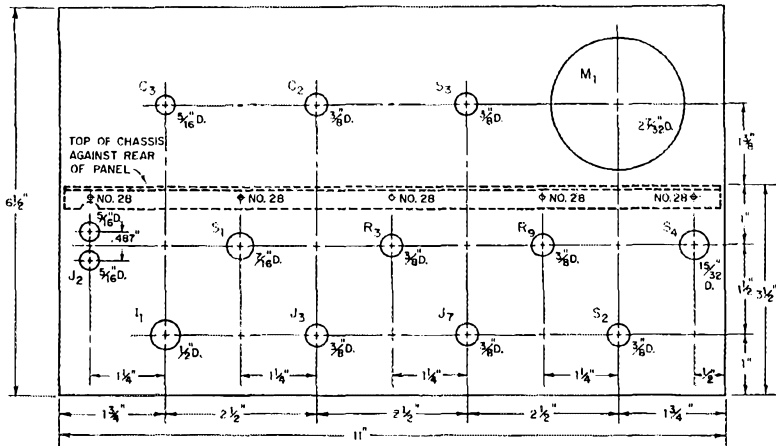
Layout drawing of the panel (front view) for the mobile transmitter.
